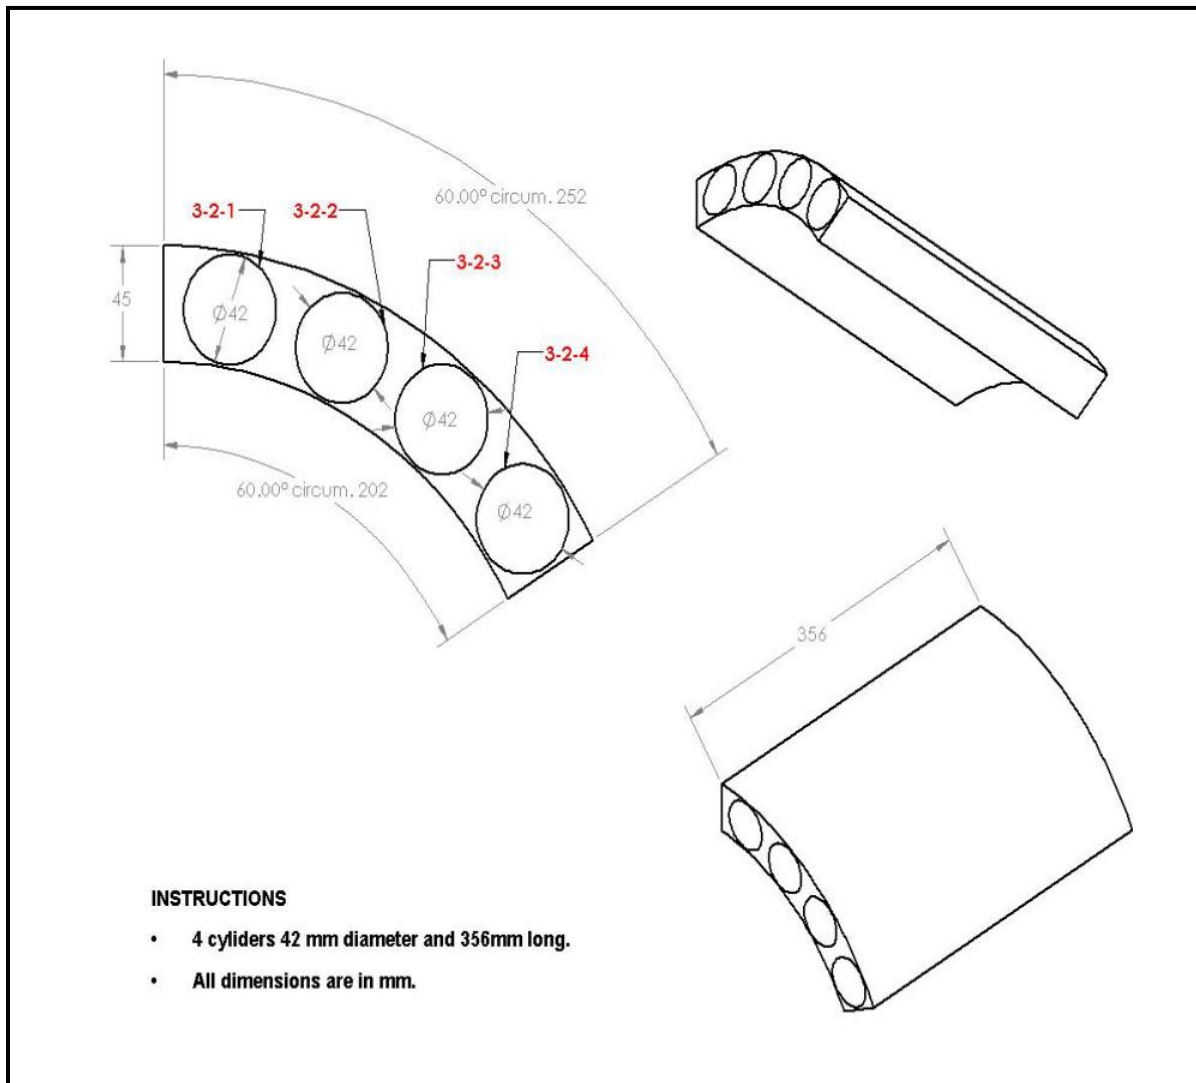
Machining layout for DEN(T-C) specimen blanks.
